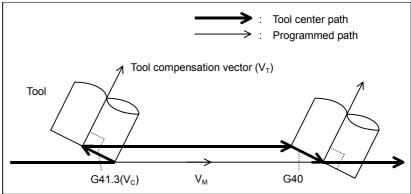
(b) When the tool vector is inclined in the tool movement direction
